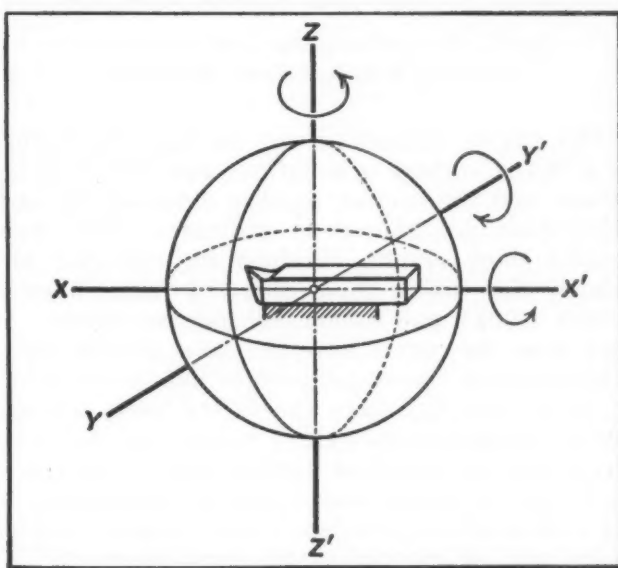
Diagram Illustrating Adjustment of Tool about Three Mutually Perpendicular Axes
